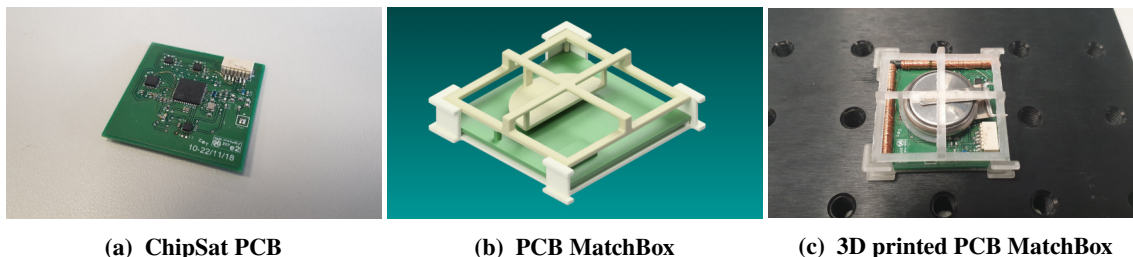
The sensor PCB with 3D printed MatchBox assembly and setup
